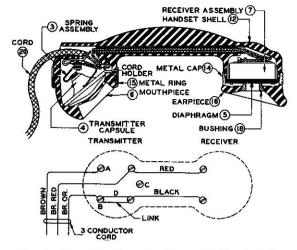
Cross-Section of a Type 38 Handset Including a Wiring Diagram
